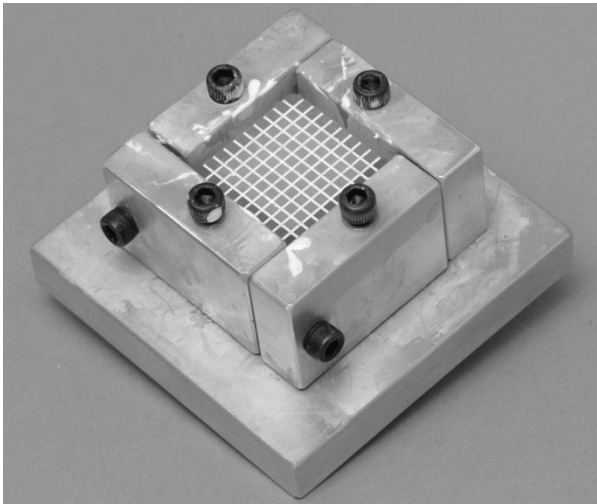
The inner dimensions of the mold are 23.00 mm \times 23.00 mm \times 21.00 mm, with a tolerance of ± 0.05 mm.
